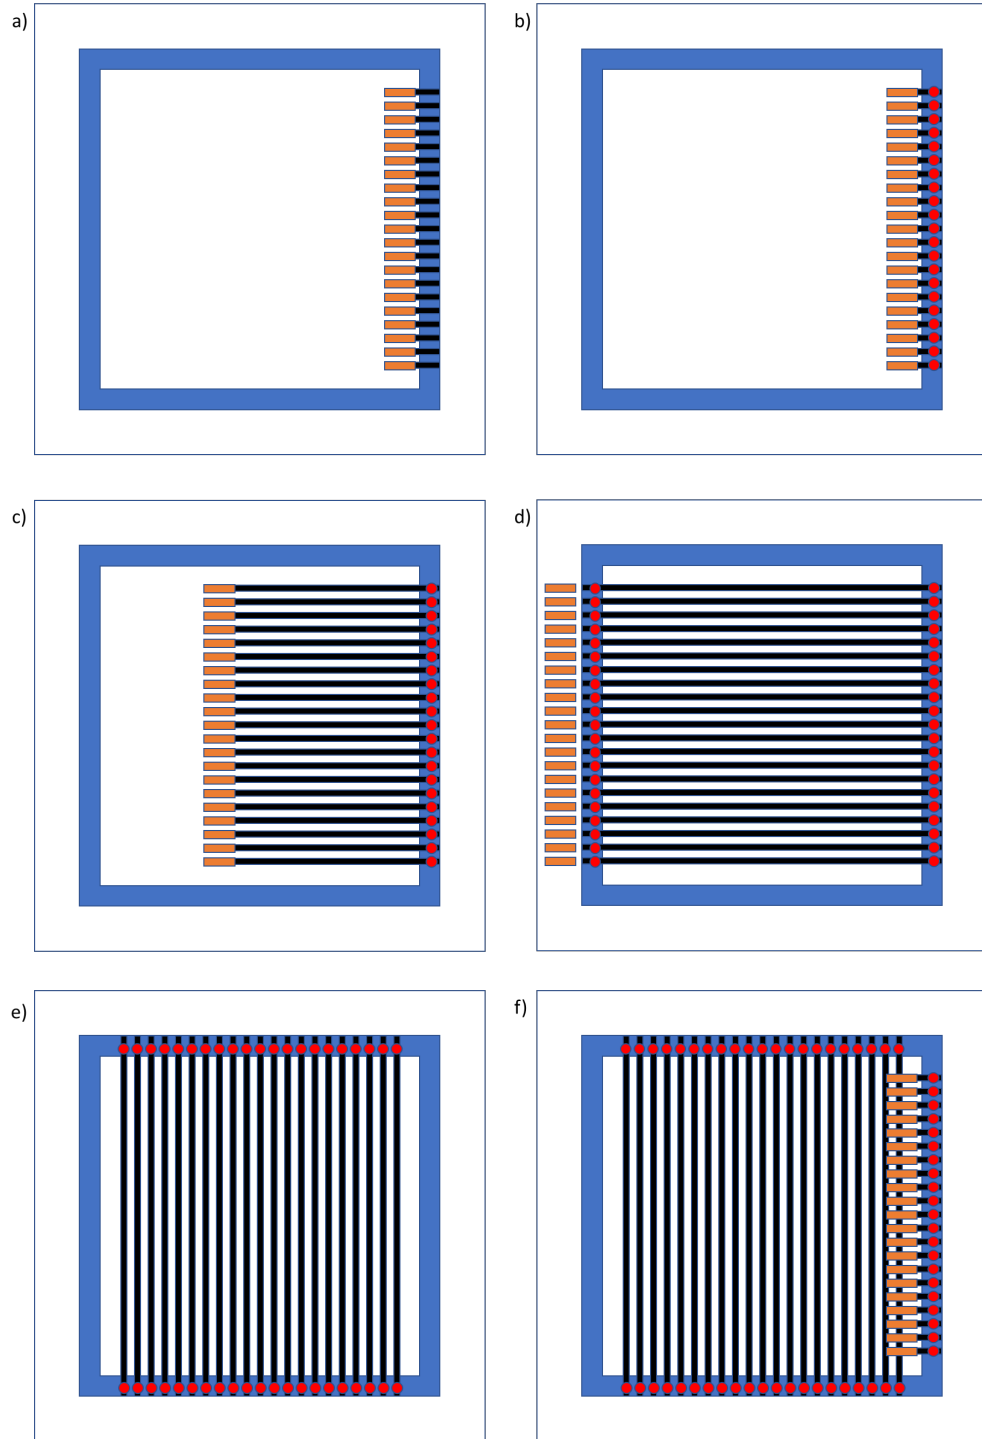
Schematic of tow laydown process a) process start, b) after tow welding, c) during dispensing, d) after weld and tow cut, e) table rotation, and f) beginning of second layer.
